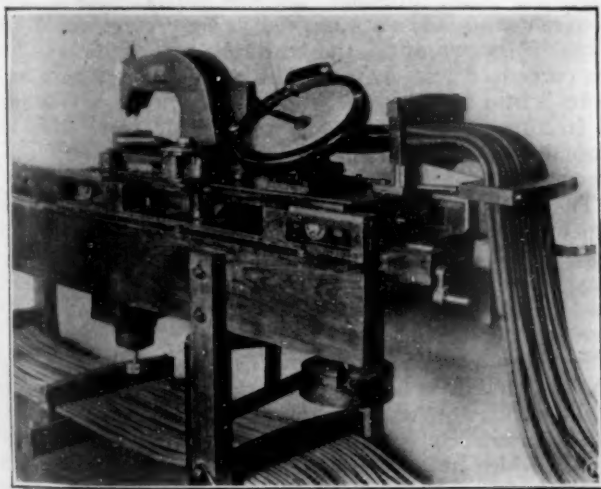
SNEAD HB-4 MACHINE, RIGHT HAND HEAD, REAR VIEW
